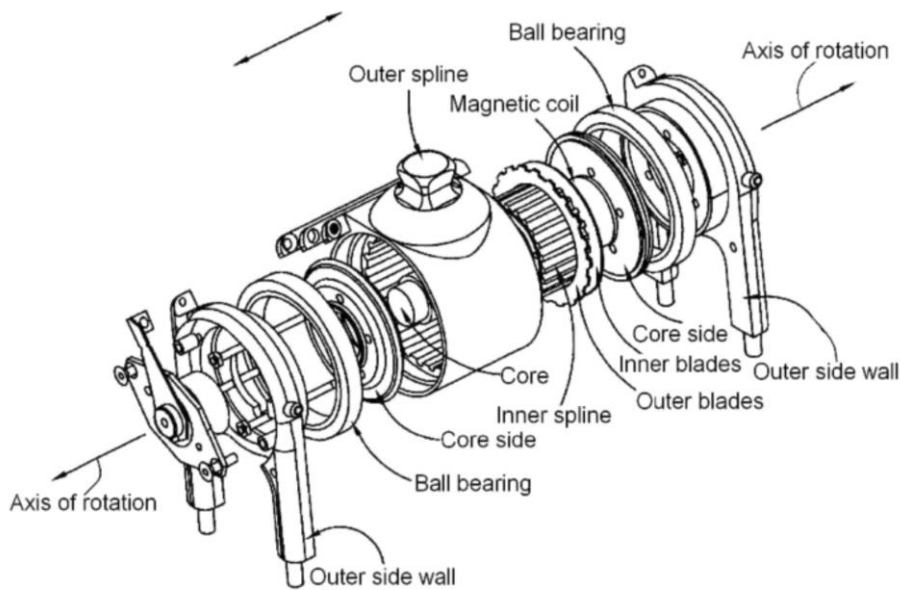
Exploded view of multi-plate MR brake (Deffenbaugh and Herr 2004)
